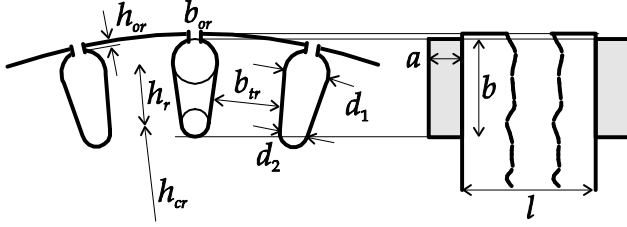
Shape and dimensions of the rotor bar and the end-ring
